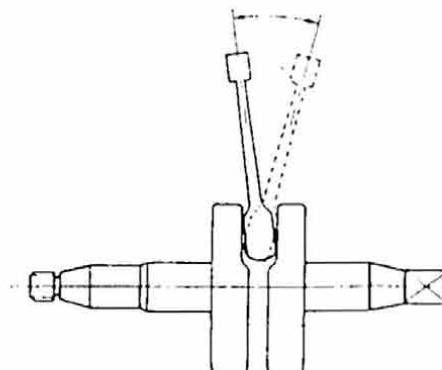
Move connecting rod small end side-to-side as shown to determine rod, bearing and crankpin wear. Refer to text.
